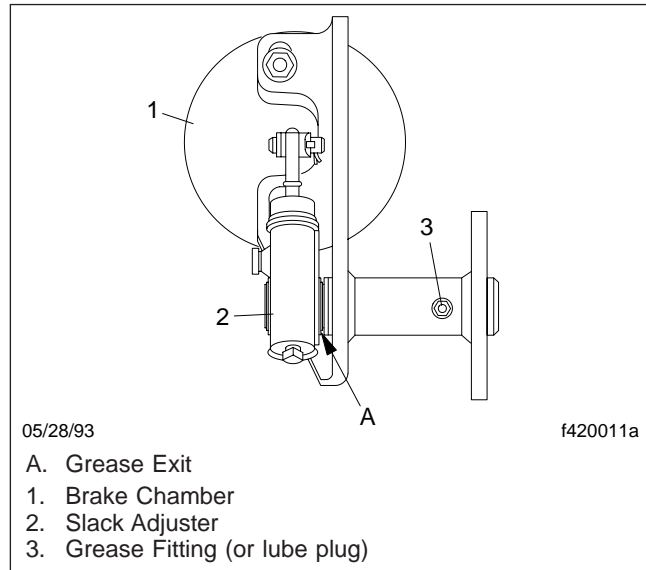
, Camshaft-and-Chamber Bracket Lubrication
